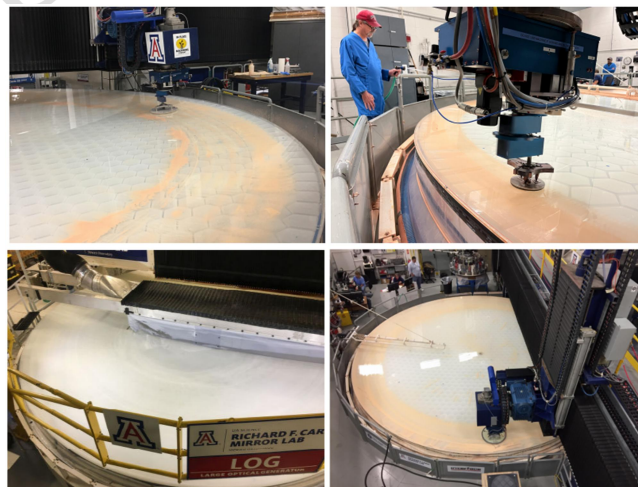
8.4 m CNC large-scale optical grinding machine (large optical generator).^{77, 117, 118}
